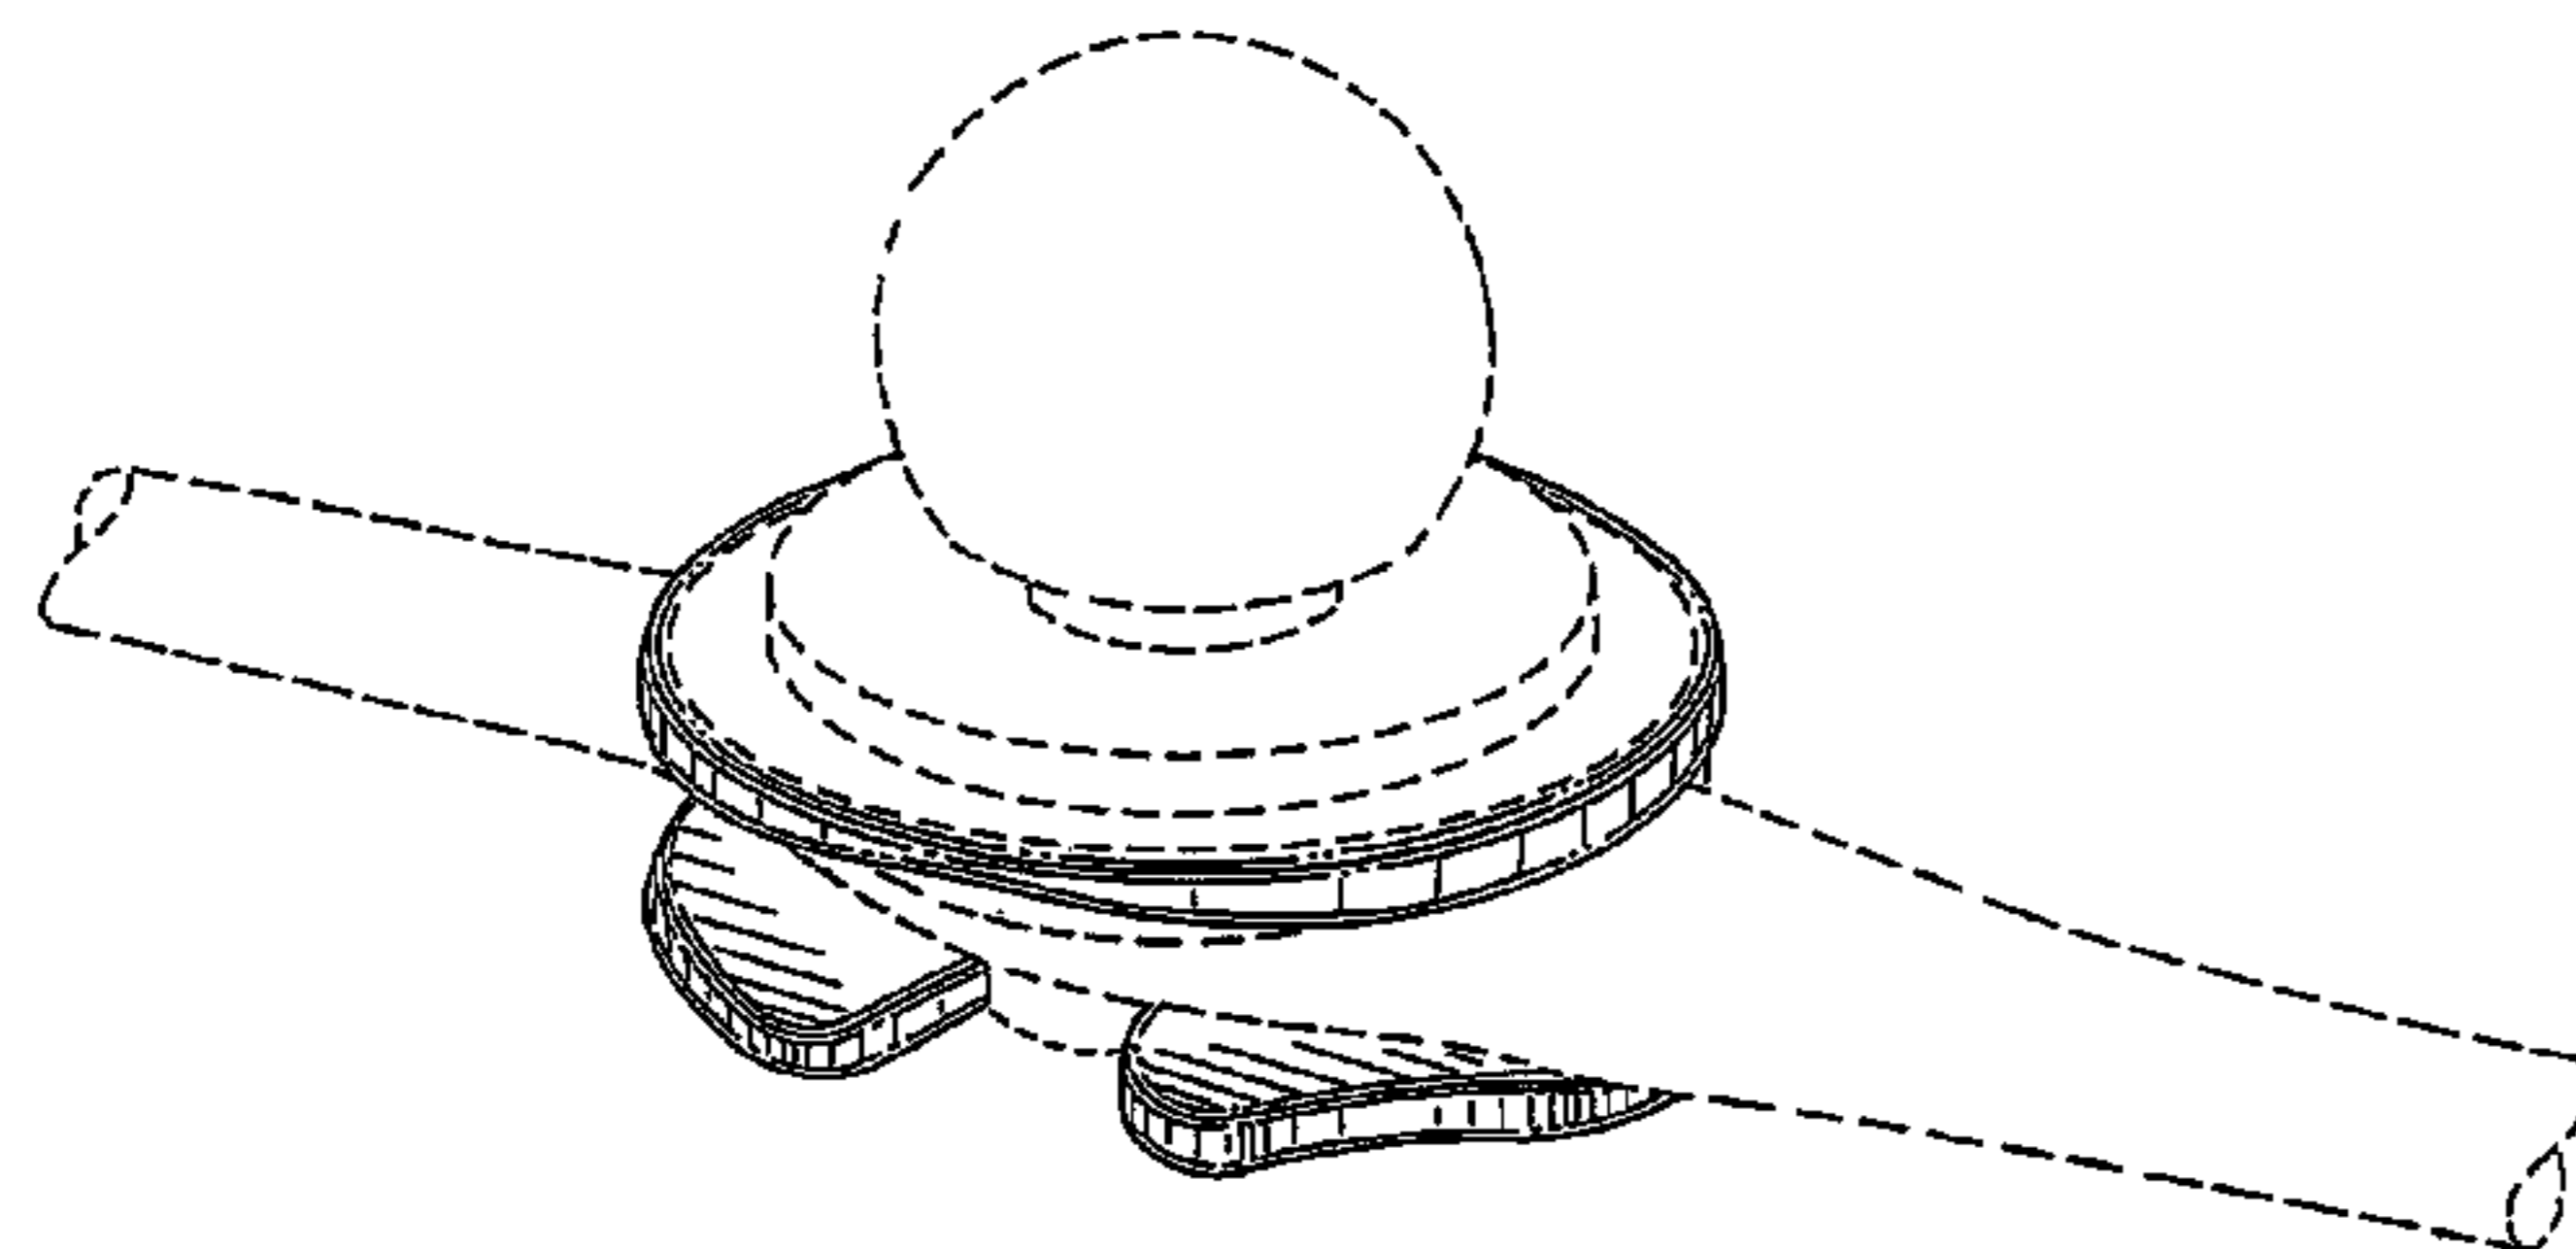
is a top front perspective view of a fastening device showing our new design.
